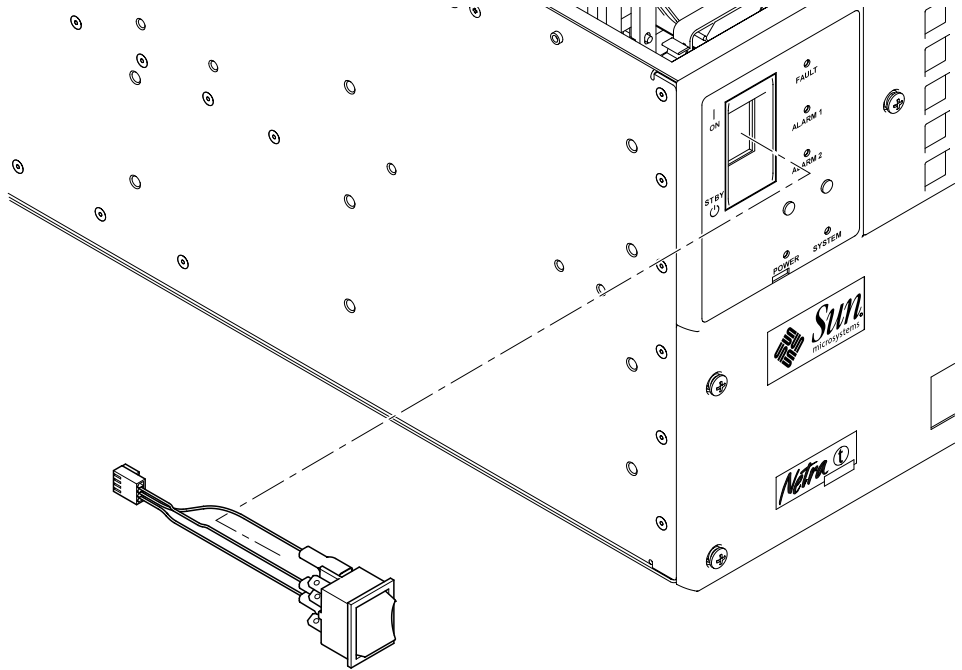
Removing and Fitting the System Switch Assembly
